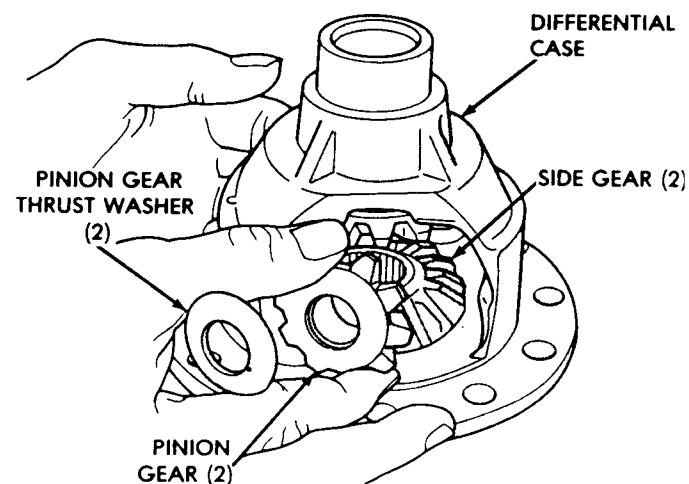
Remove or Install Pinion Gears, Side Gears, and Tabbed Thrust Washers, by Rotating Pinion Gears to Opening in Differential Case
